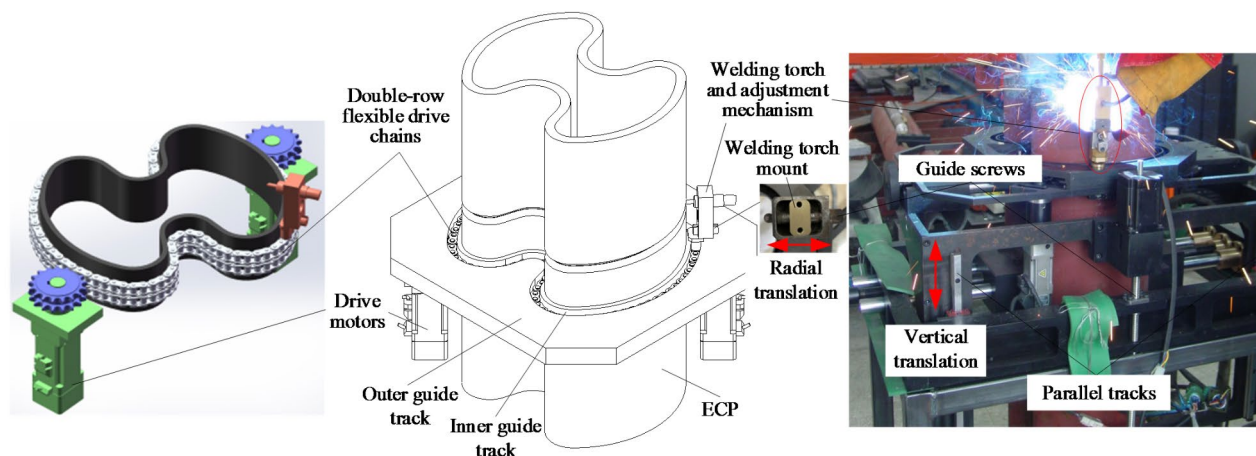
Structure of mobile welding robot for 8-shaped ECP.
